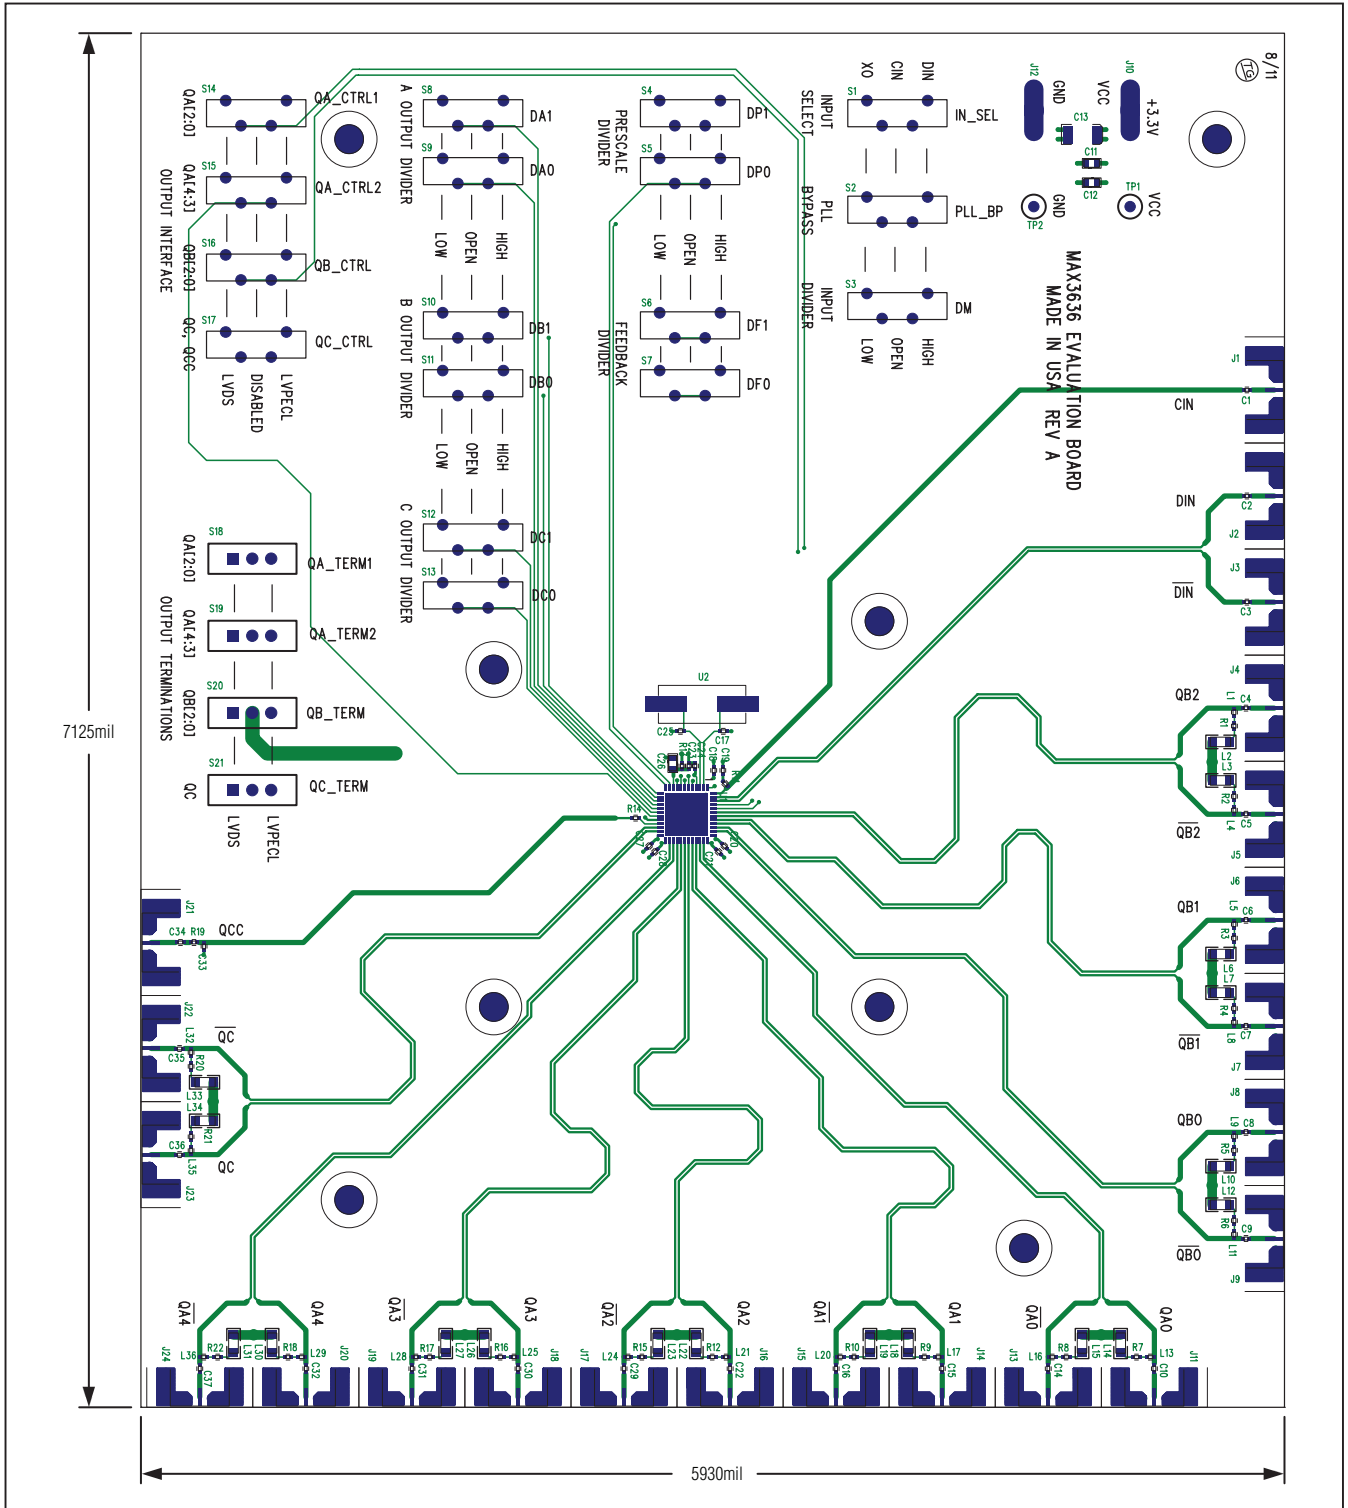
MAX3636 EV Kit Component Placement Guide—Component Side
